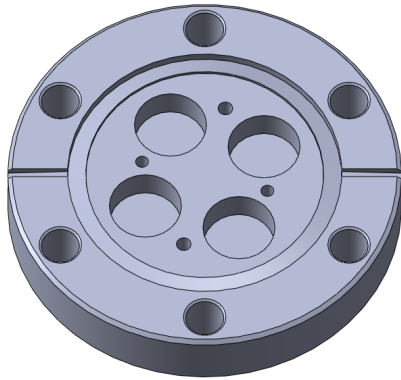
A rendering of the feedthrough flange with threaded holes for the supporting rods. Not pictured are the BNC pins that extend from the center of the four symmetrically placed recesses.
